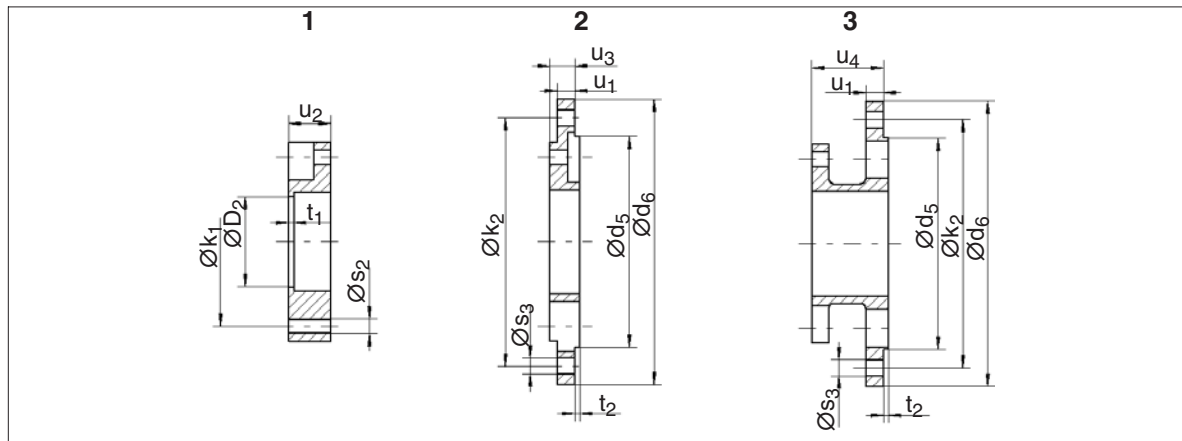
Dimensional survey of ARPEX components for "C" flange, "F" flange and "D" flange
